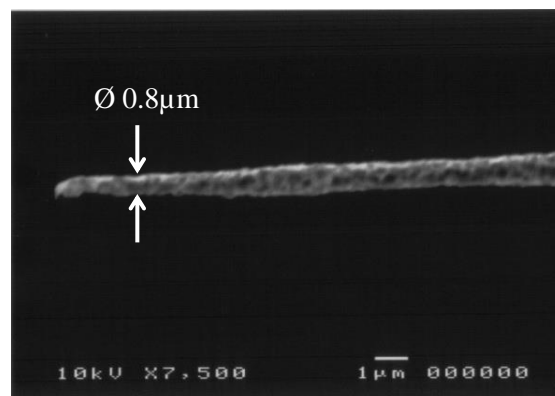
Minimum rod diameter machined with EIFM [56]
